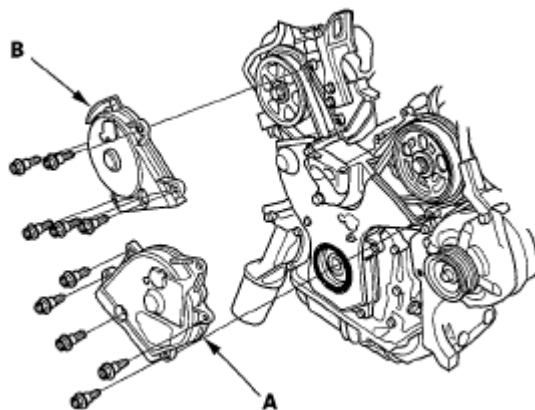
Identifying Front Upper Cover And Rear Upper Cover
